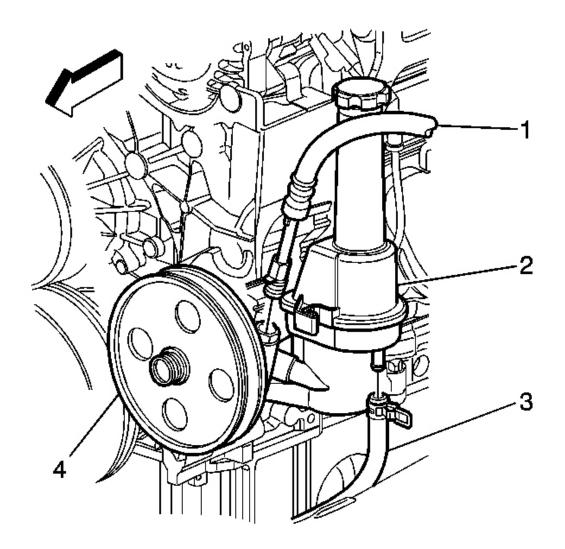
View Of Power Steering Pressure Hose, Return Hose & Pump Courtesy of GENERAL MOTORS CORP.
